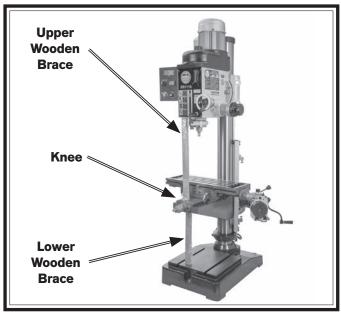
Wooden shipping braces to be removed during assembly (SB1116 shown).
